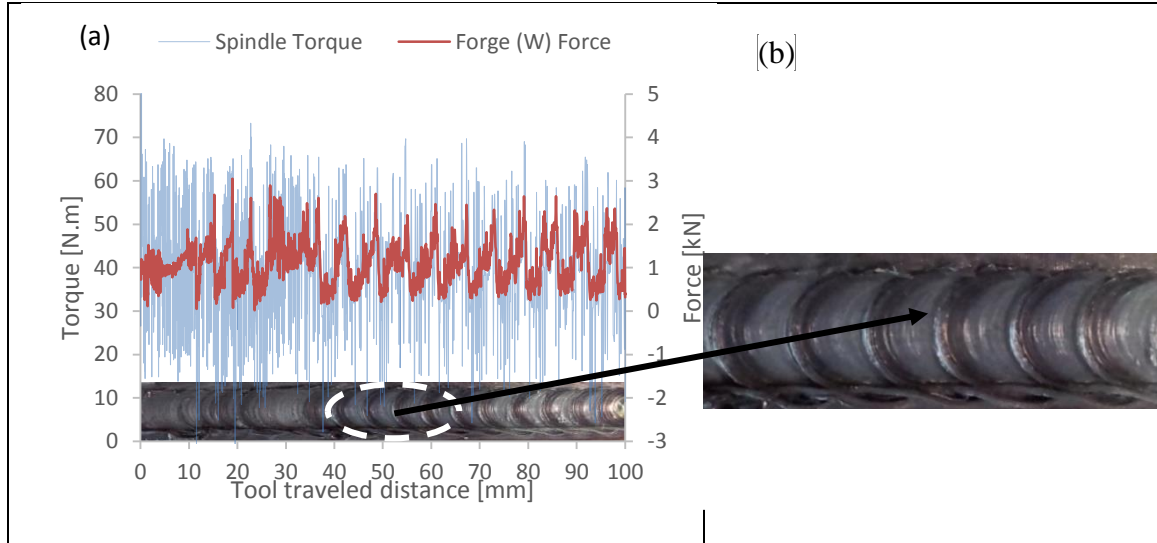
(a) welds with torque and axial force at 2000 rpm (b) onsets.
